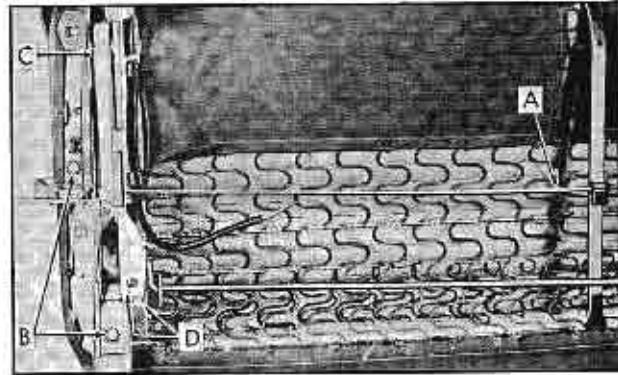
Removal of Seat Adjuster from Seat Assembly
